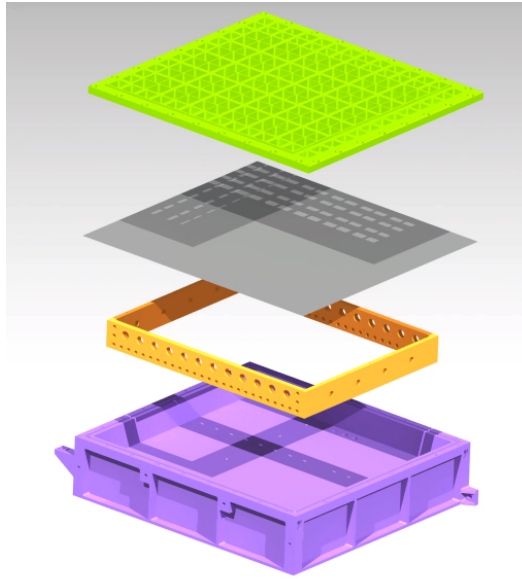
Exploded view of a POLIX proportional counter showing its main mechanical components. From bottom to top is the proportional counter housing, Wireframe, Mylar[®] window, and the window support plate. (Fig. credits: Rishin PV)
